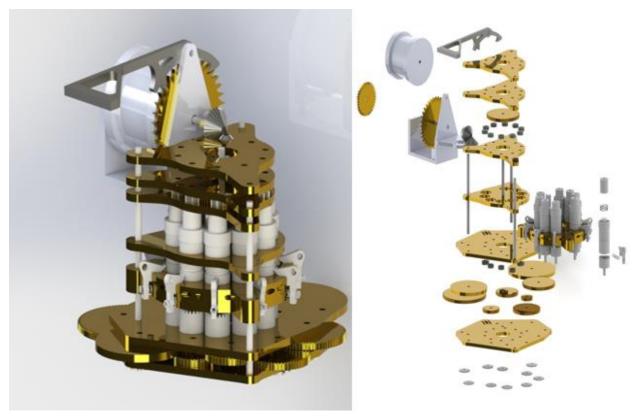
Rendering of the Gear Box and an Exploded View of the Gear Box
